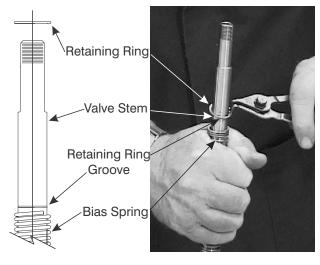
Secure Bias Spring and Seat on Valve Stem.
